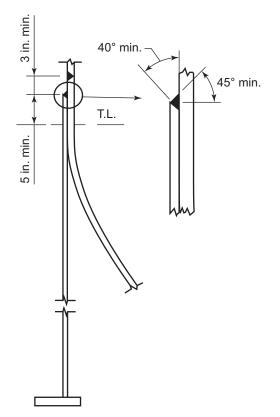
Skirt-to-Shell Attachment Weld is Moved Up On the Shell From the Tangent Line to Remove the Weld From the High Stress Area
